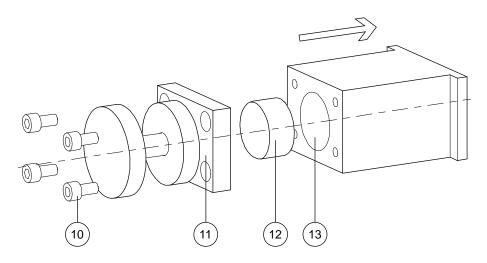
Replacing adjustable die housing (outer side) bearing
